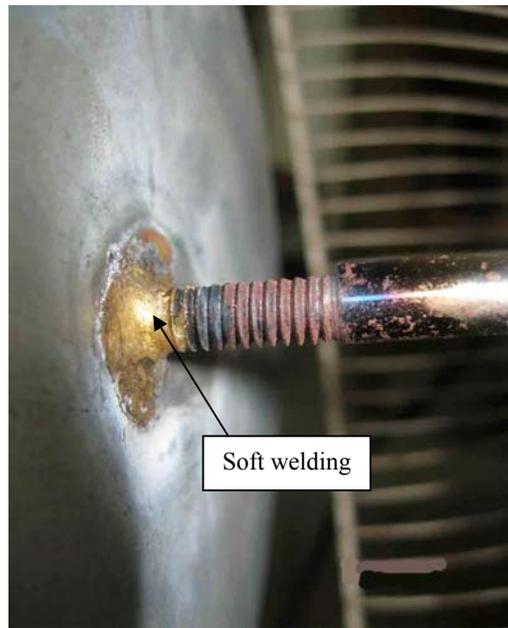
Soft welding of aluminium sheet with shaft
